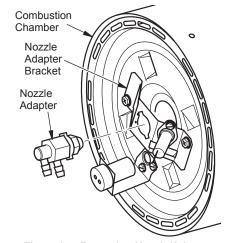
Removing Nozzle/Adapter Assembly (100/150 Models)
